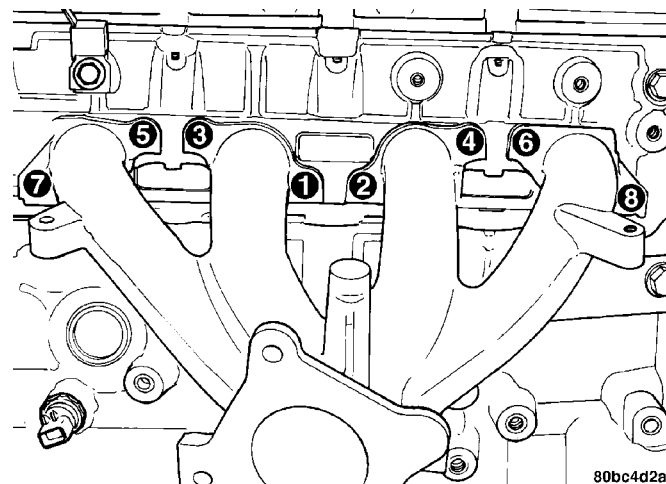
Exhaust Manifold Tightening Sequence-Typical
